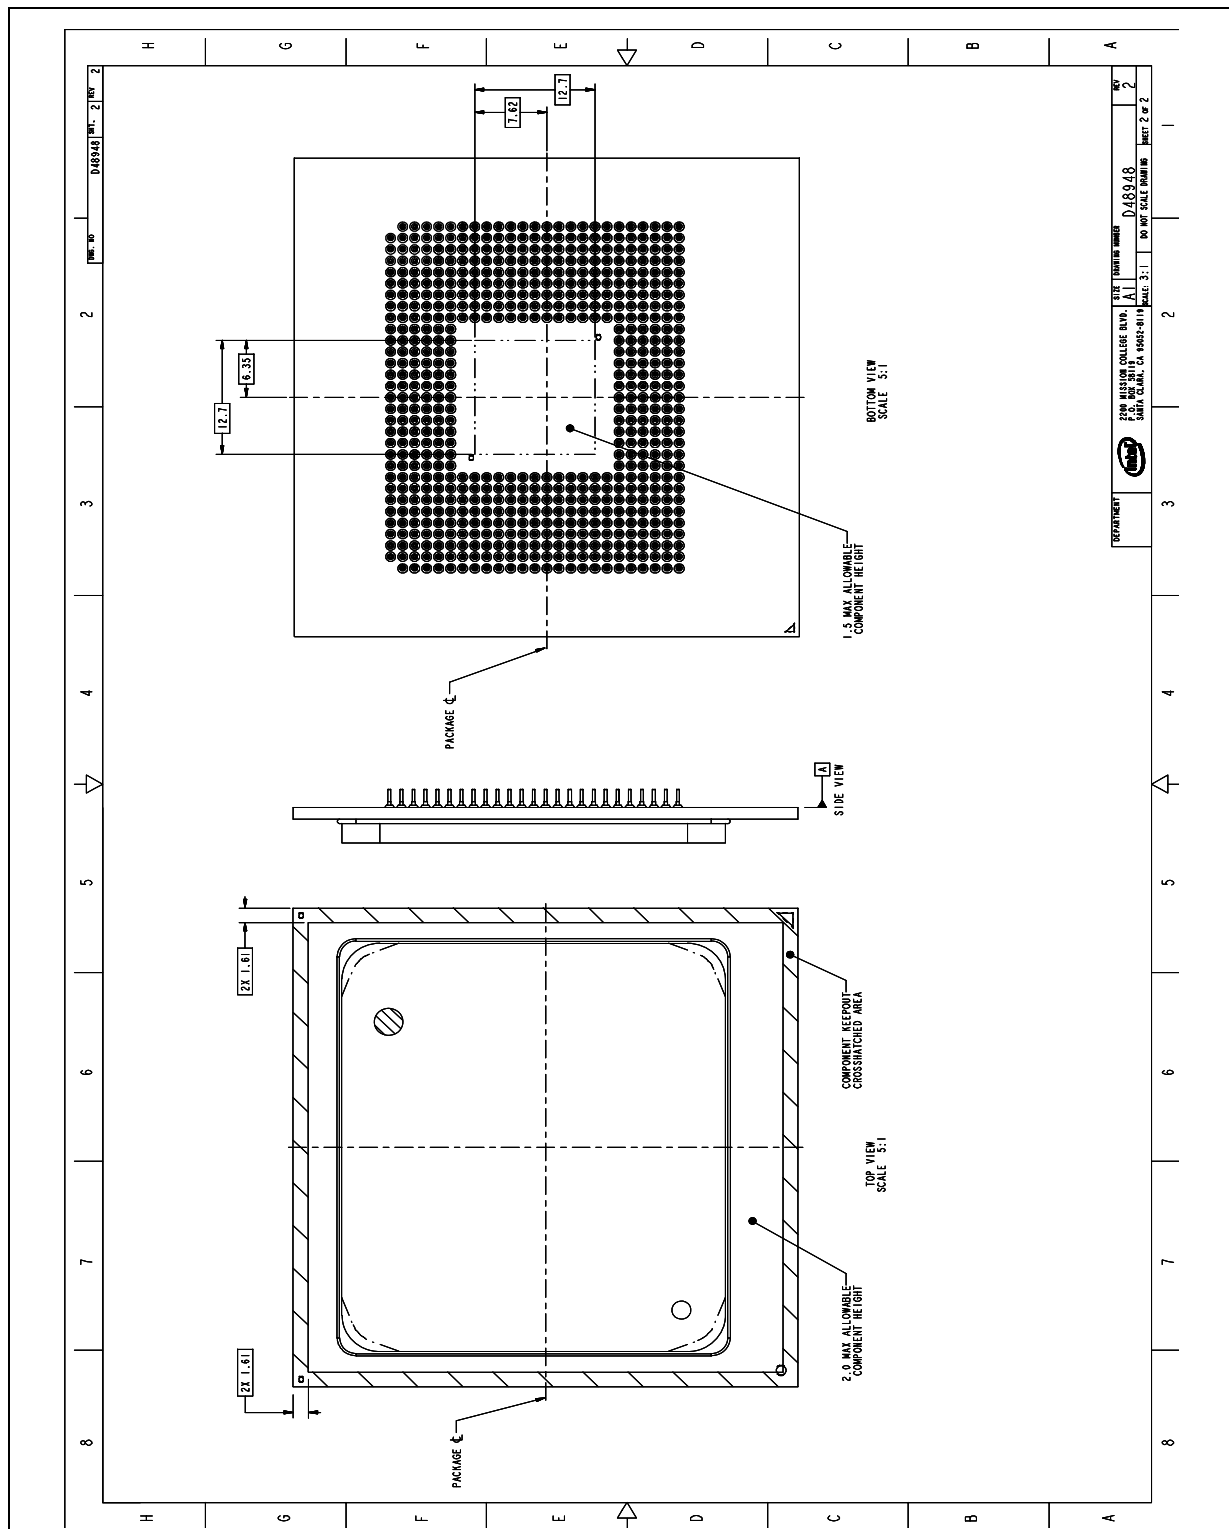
Processor Package Drawing (Sheet 2 of 2)
